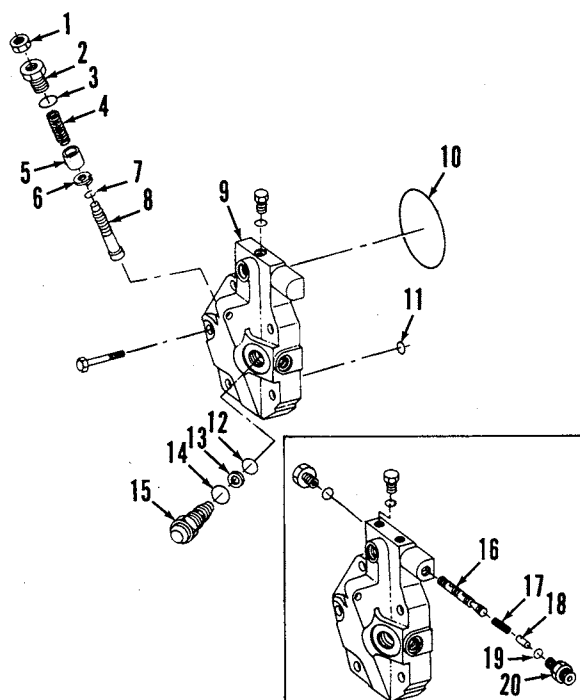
Exploded view of rockshaft cylinder end cover. Lowering valve (16) shown in inset is used on early 4050, 4250 and 4450 tractors equipped with lift assist cylinder.
